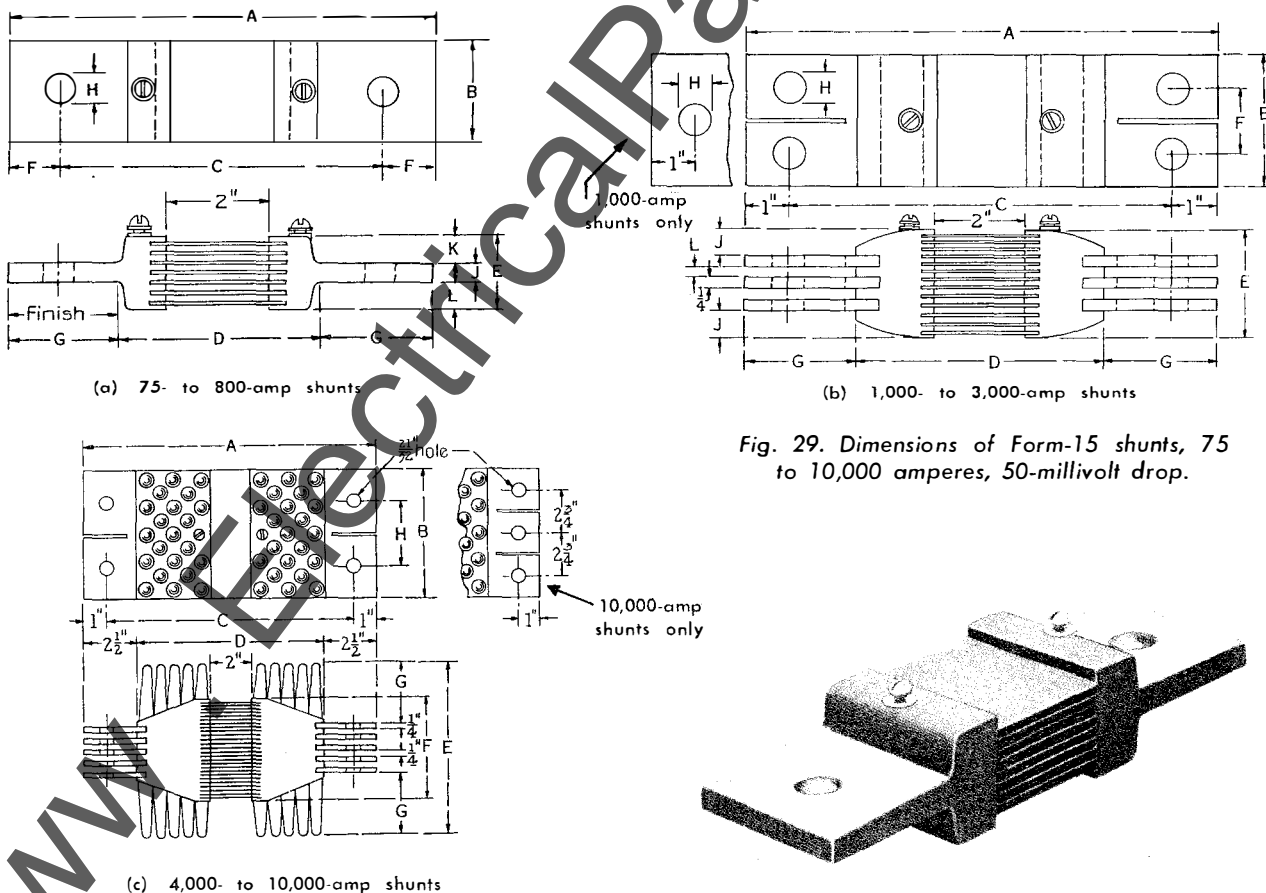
Dimensions of Form-15 shunts, 75 to 10,000 amperes, 50-millivolt drop.
